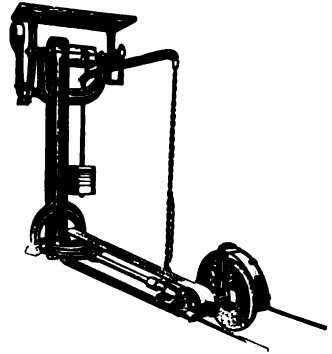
Excelsior Tool and Machine Co. East St. Louis, Ill.
